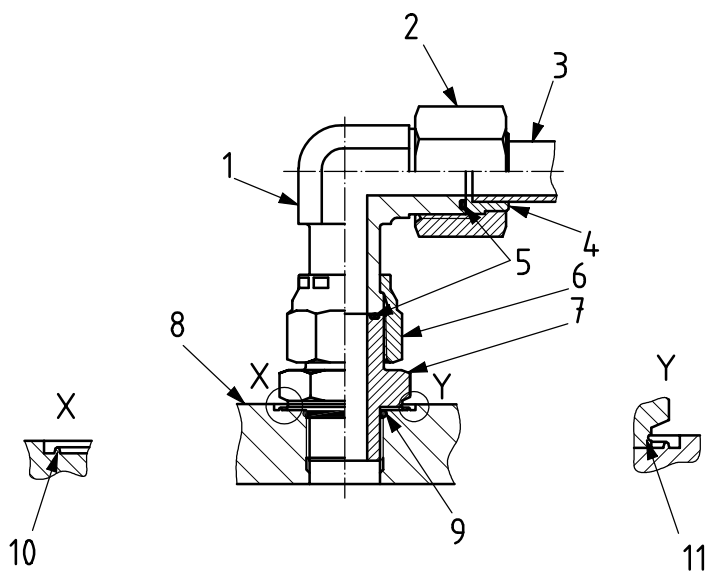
Typical connection with O-ring face seal connectors — Non-adjustable style connector
